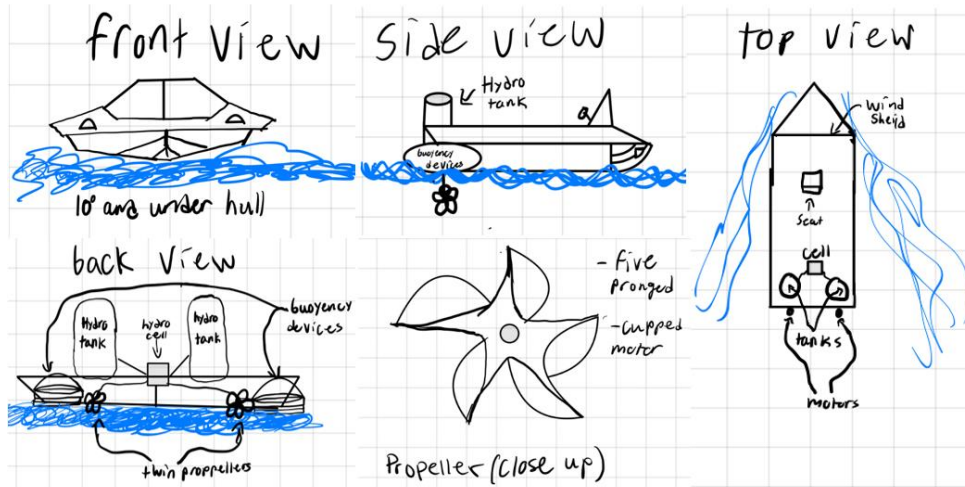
The front, side, top, and back view of Boat Design #1 with an additional close-up of the propellers
